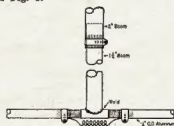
Method of mounting the yagi reflector and director to the boom end is shown above. The details are given in the text.
